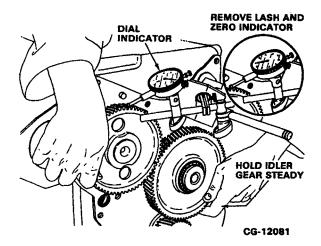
Measure Camshaft Gear to Idler Gear Backlash
